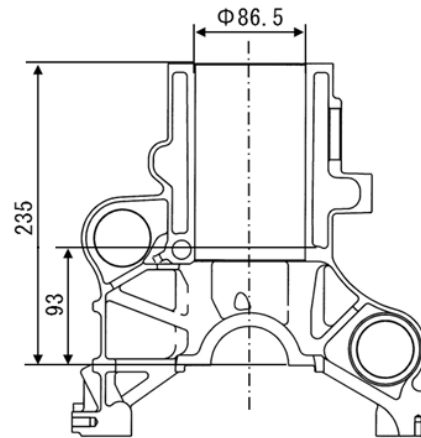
Sectional View of the 4G64 Engine Block (Mitsubishi, 2001)
